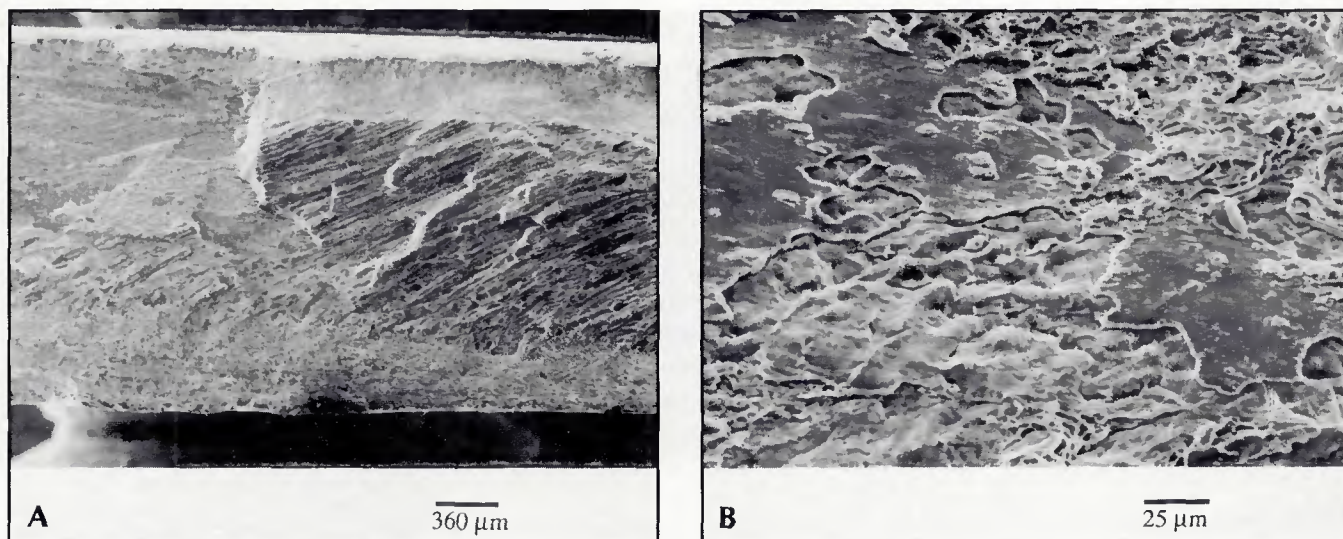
SEM fractographs of GTA weldment in solution heat treated and aged at 160°C for 4 h. A—Overall fracture surface; B—partially melted region
